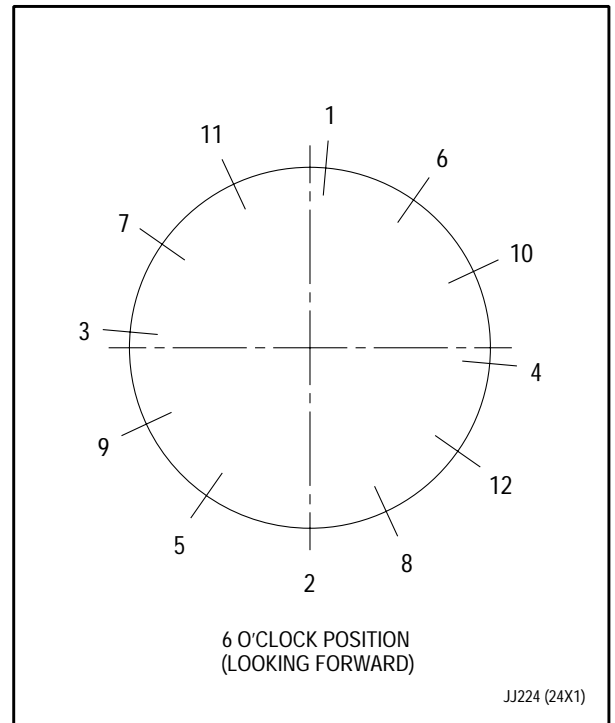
No. 5 Bearing Inner Race and Rollers - Installation (Sheet 4 of 5)
